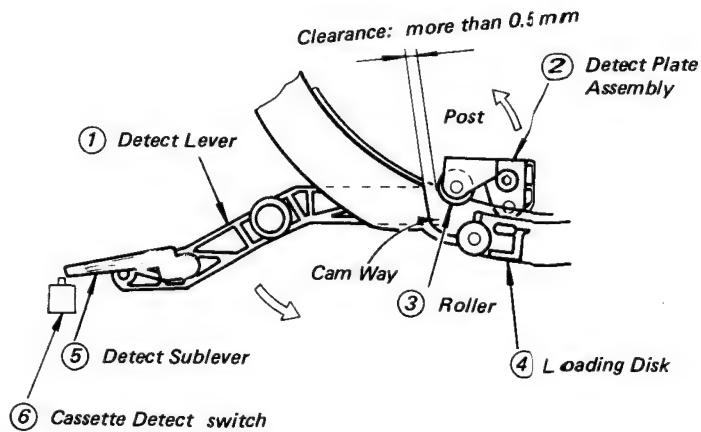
Clearance Between Loading Disk Cam Way Corner and Roller at Time when this goes away
